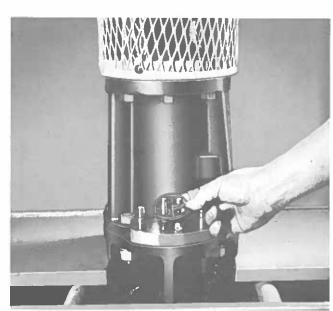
Installing Terminal Box Gasket (Flat-Faced Type Shown)
